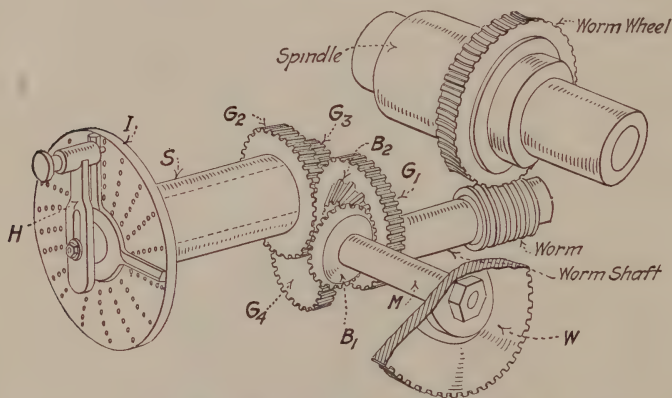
Spiral head gearing (Cincinnati). Motion transmitted from W through M to B_1 to B_2 to G_1 to G_2 , through sleeve S to I to H , through shaft within S to G_3 to G_4 , through wormshaft, worm, and wormwheel to spindle and work.
